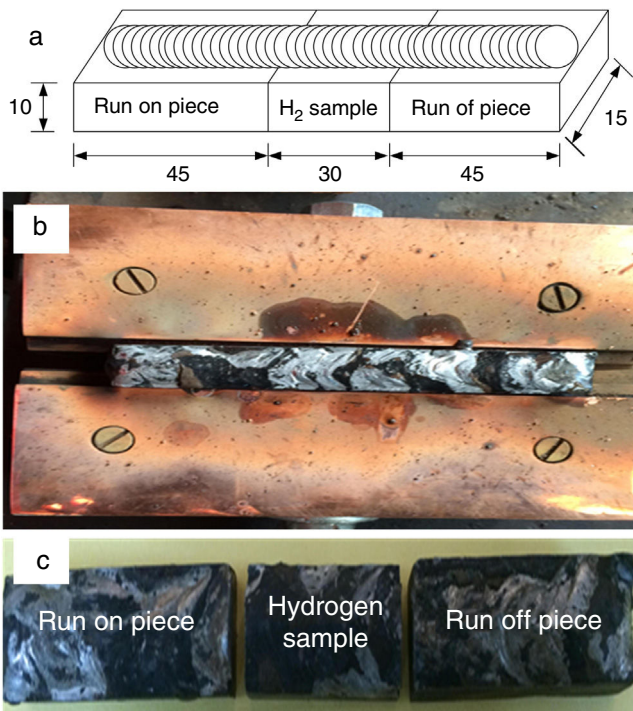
(a) Schematic of test assembly, (b) specimen hold in copper jig fixture, (c) broken test assembly.
